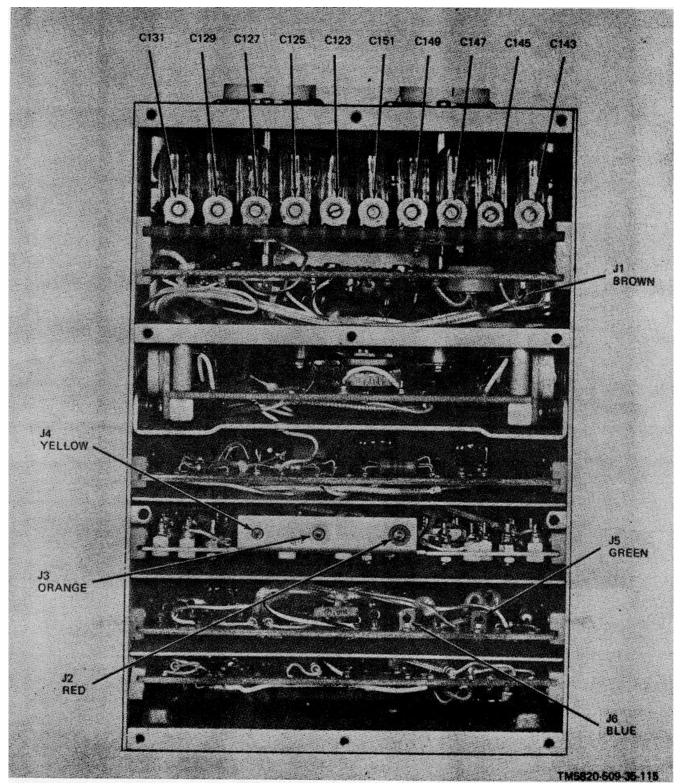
Oscillator Control C-4311-PRC-47 (A8A7), Top View, Location of Test Points and Adjustments.
